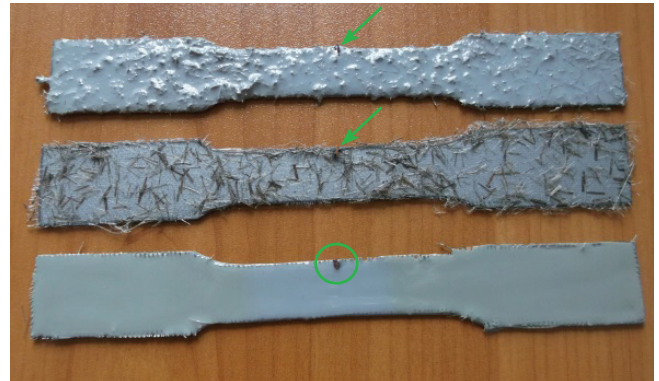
Oar-shaped samples with notch cut with diamond wire
